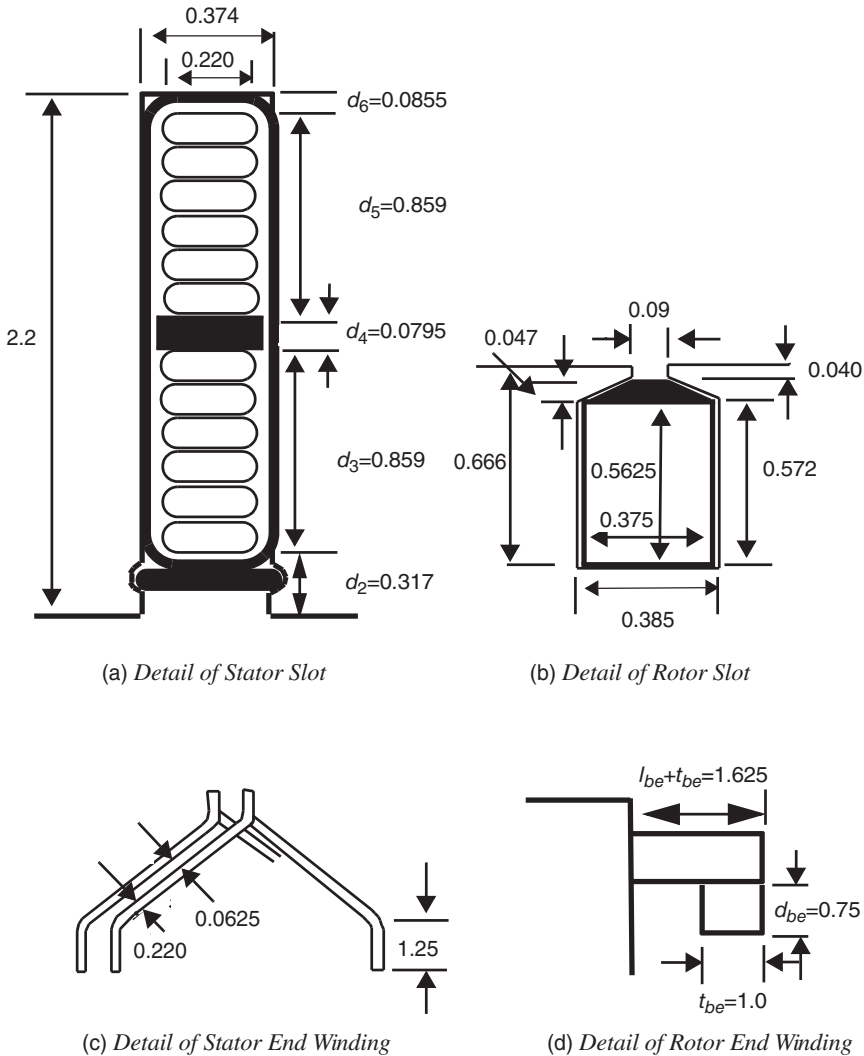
Detailed slot and end-winding configurations for 250 HP machine.
